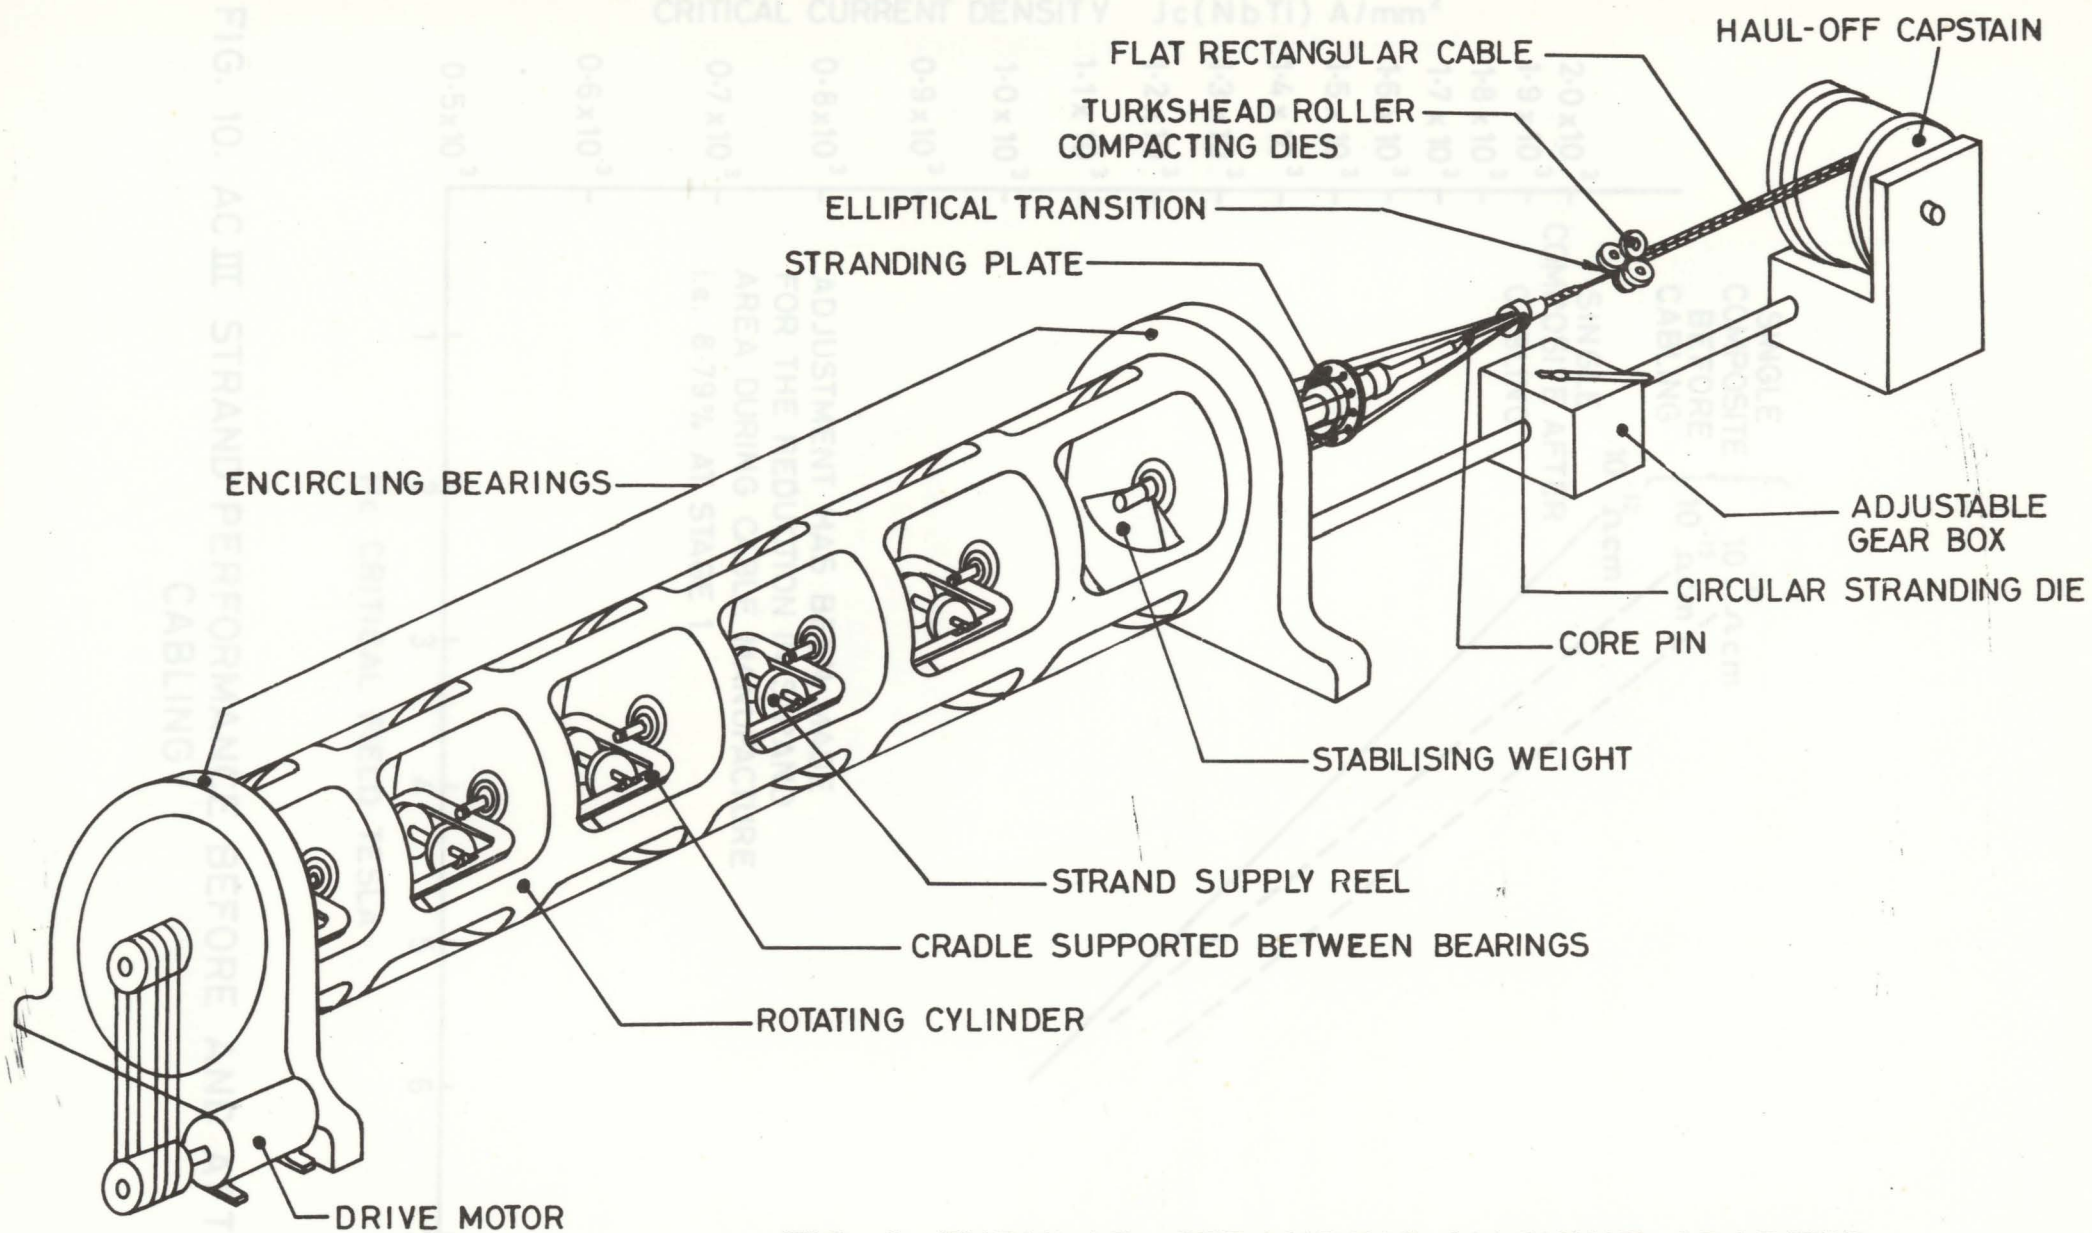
TUBULAR STRANDING MACHINE ADAPTED FOR A.C.V. CABLE M.F.R.
